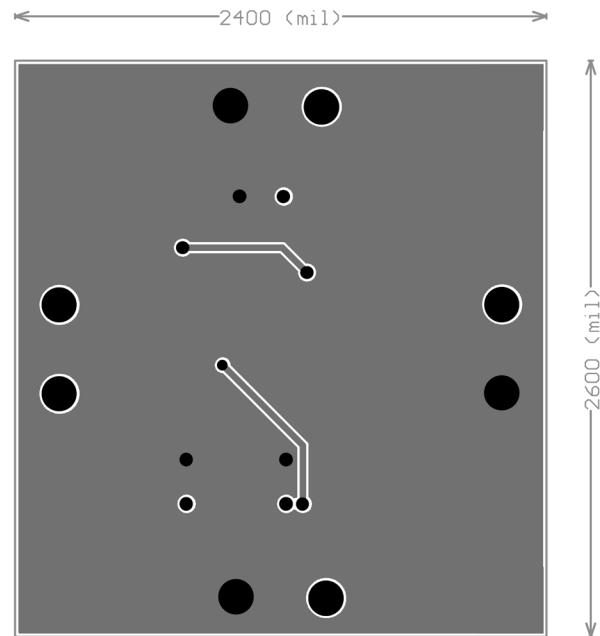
LM3477 Evaluation Board PCB Layout (Bottom Side)
